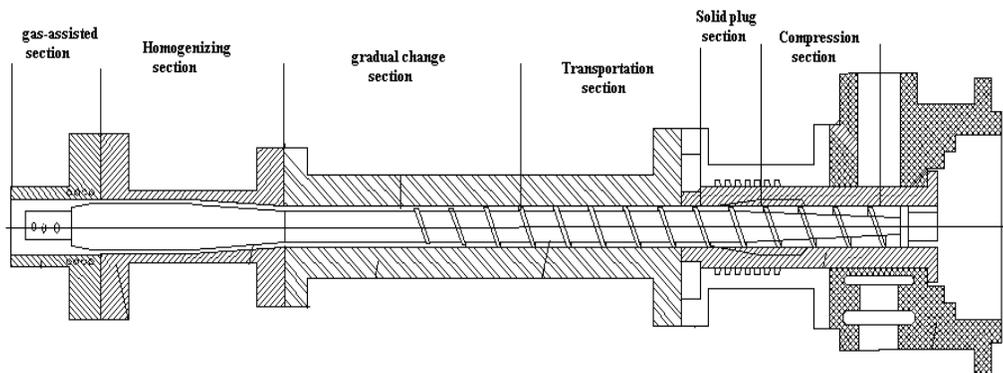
Schematic drawing of UHMW-PE molding in barrel method
